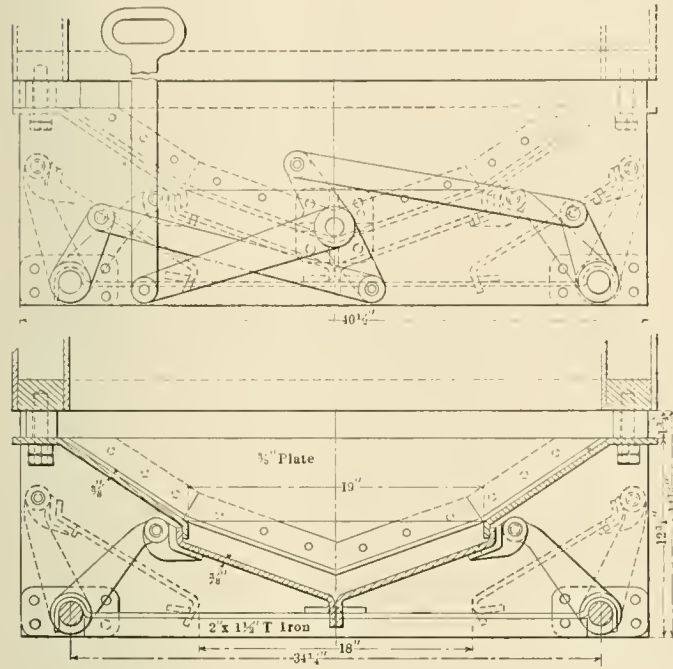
SHALLOW ASH PAN WITH LONGITUDINAL SLIDING DOORS—NASHVILLE, CHATTANOOGA AND ST. LOUIS RAILWAY.
